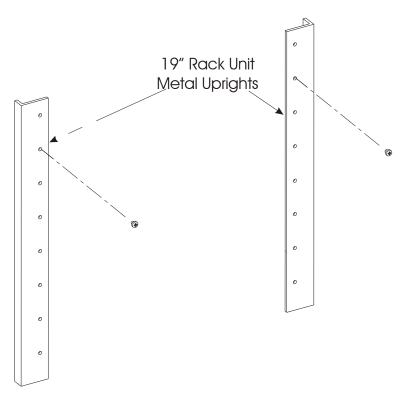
Screws for Hanging 19" Frame in Rack Unit - Exploded View
